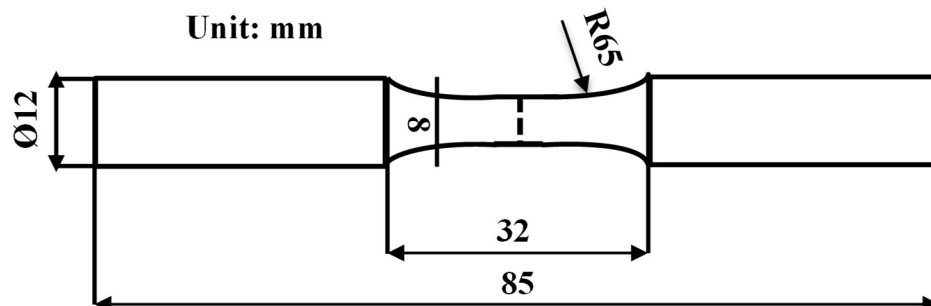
Fatigue test specimen dimension in mm (ASTM E466-15) (standard test methods for tension testing of metallic materials).
